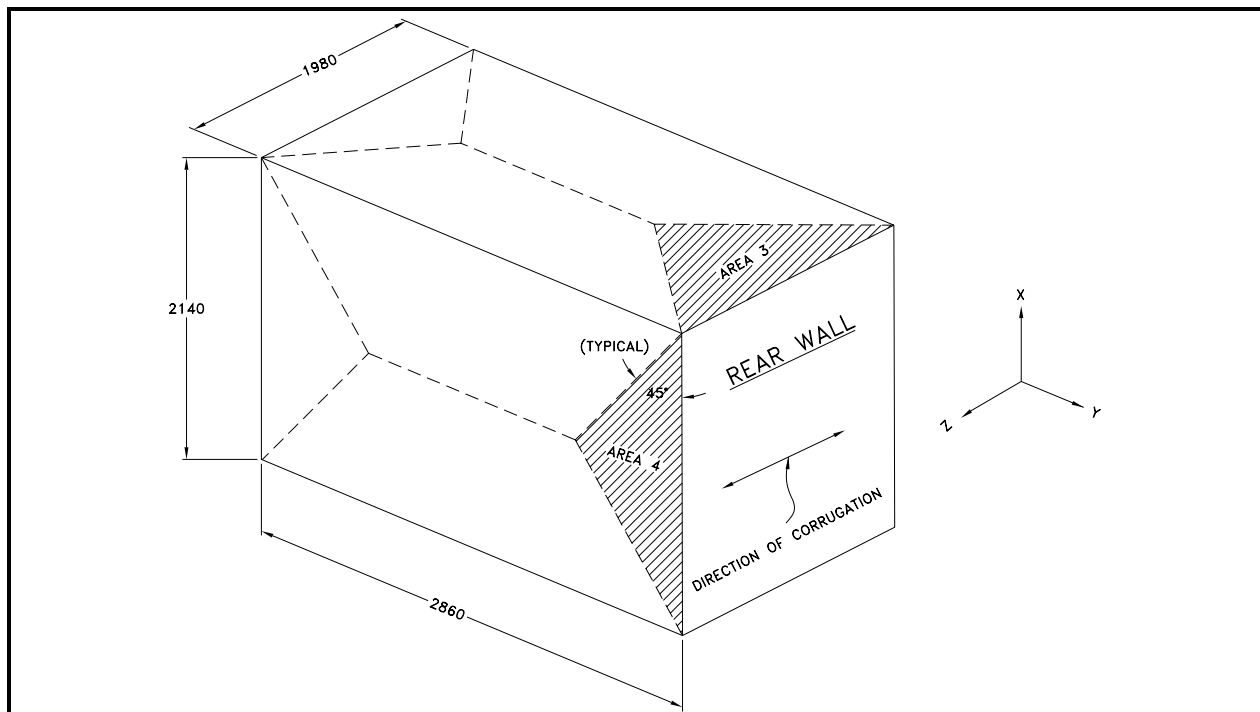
(b) – View of Rear Wall and Adjacent Walls, Showing Areas Used to Calculate Edge Loads for the Rear Wall
